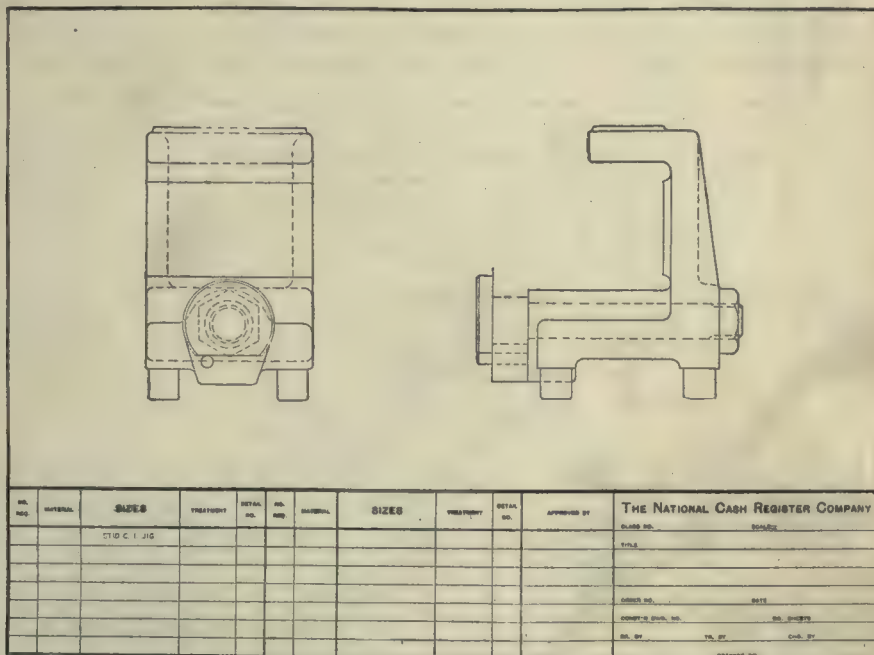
PRINTED OUTLINES OF A JIG BODY
